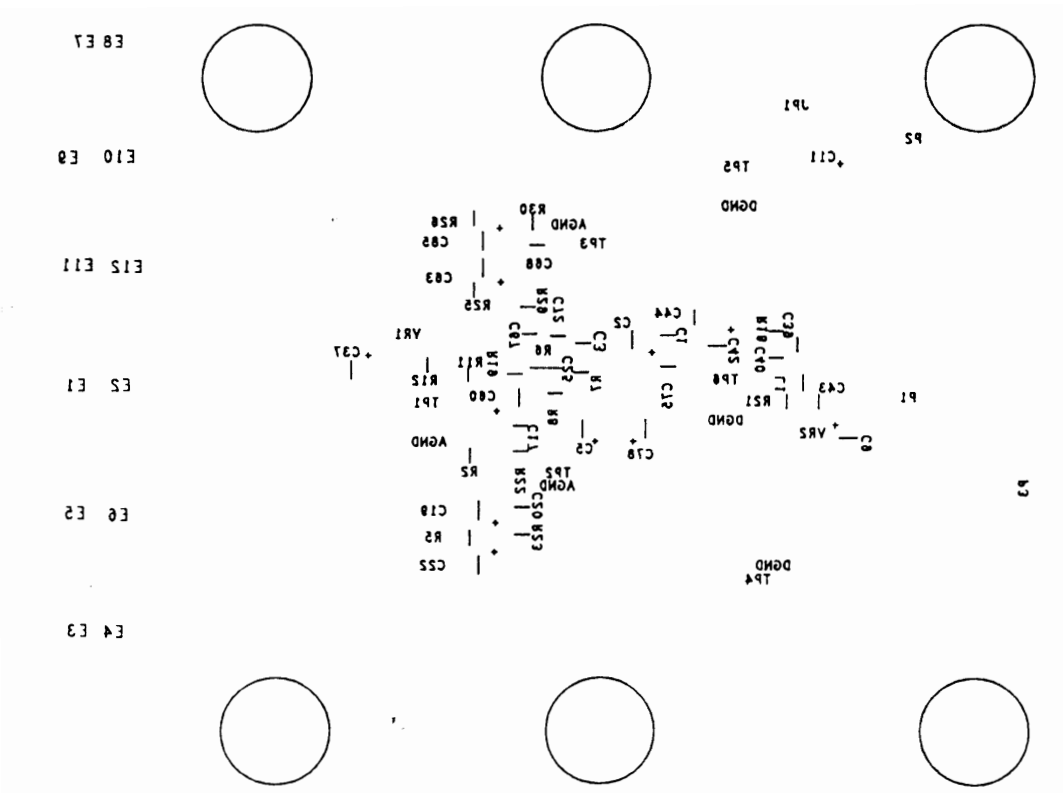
HI5762EVAL2 EVALUATION BOARD PARTS LAYOUT (FAR SIDE)
